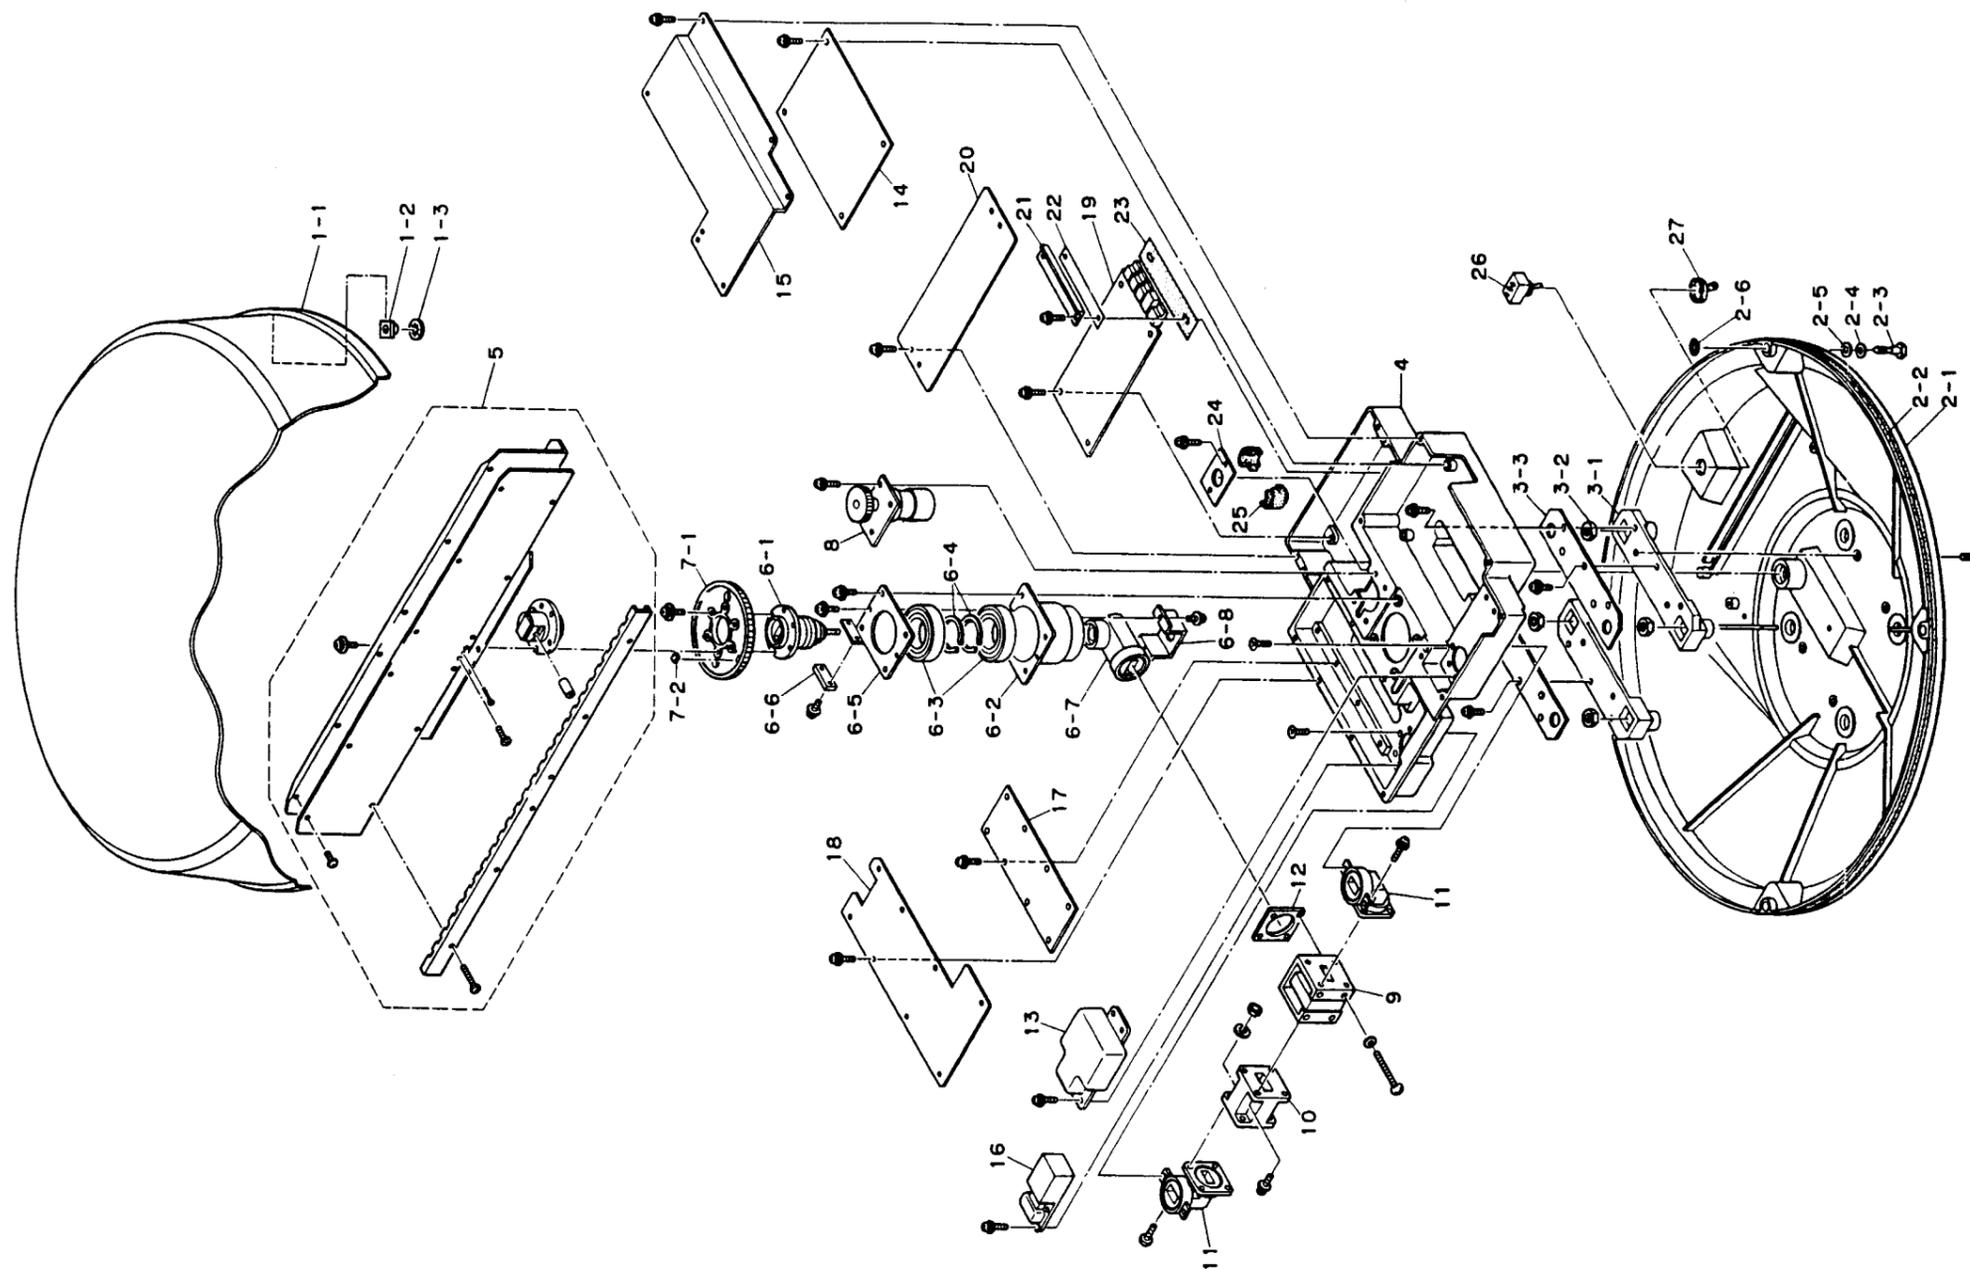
ASSEMBLY DRAWING OF RADOME SCANNER UNIT
